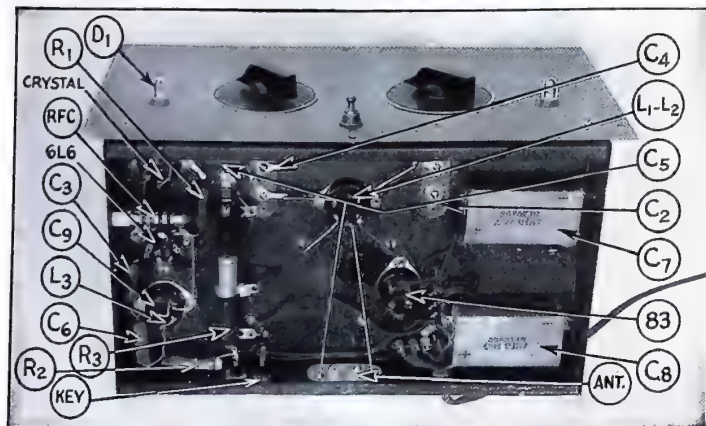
Bottom view of the metal model showing placement and wiring of parts underneath.
